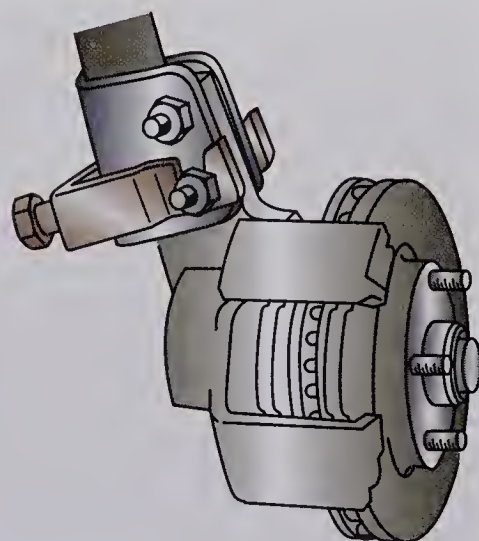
Camber adjustment with special tool inserted on rear lower strut-to-knuckle bolt.
